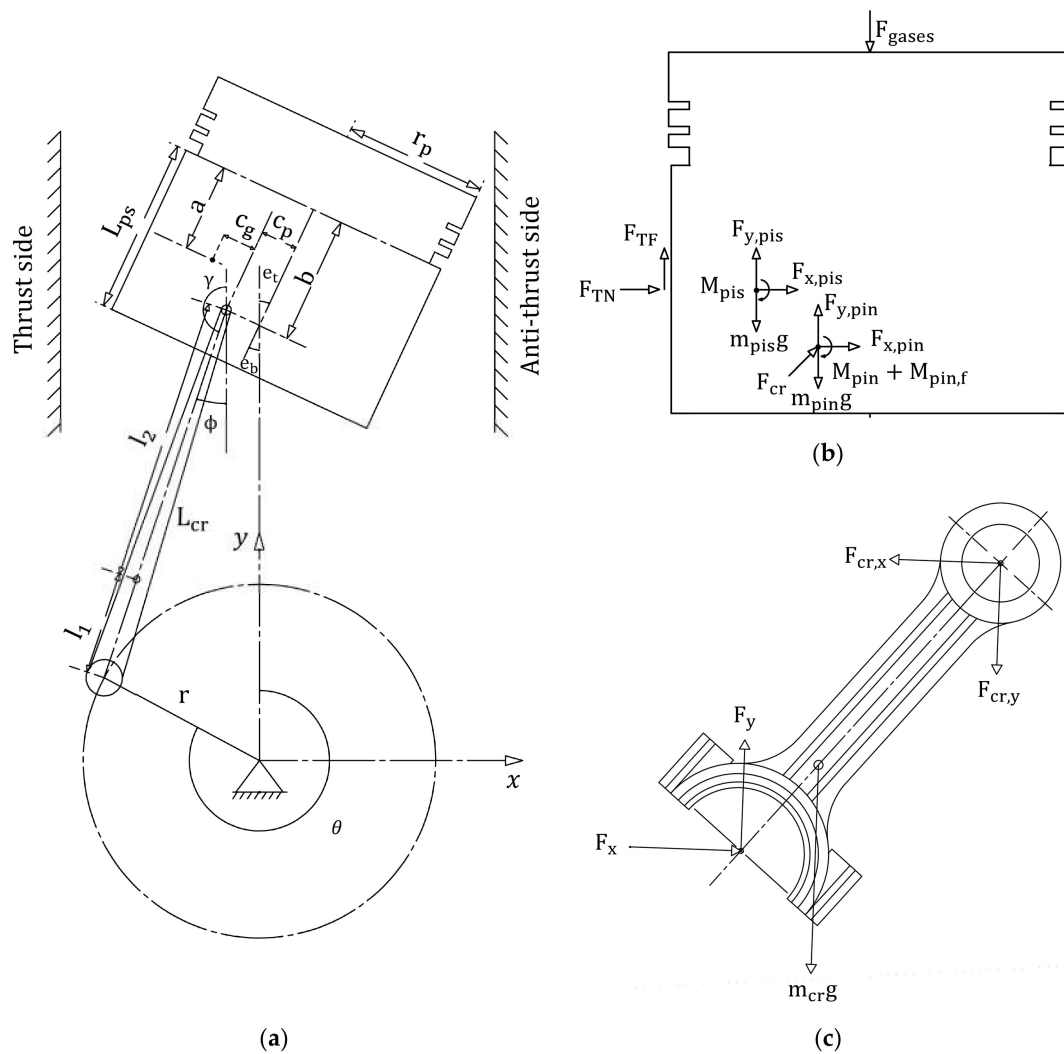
(a) Crankshaft-connecting rod-piston system, (b) forces on piston, and (c) forces on the connecting rod.
